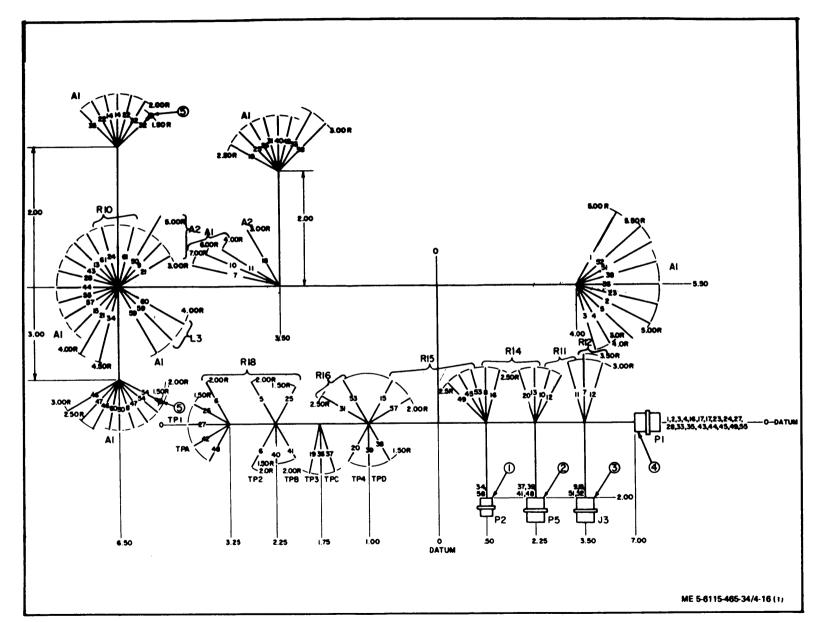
50/60 Hz Governer Control Unit Wiring Harness, Drawing No. 69-731 (Sheet of2)
